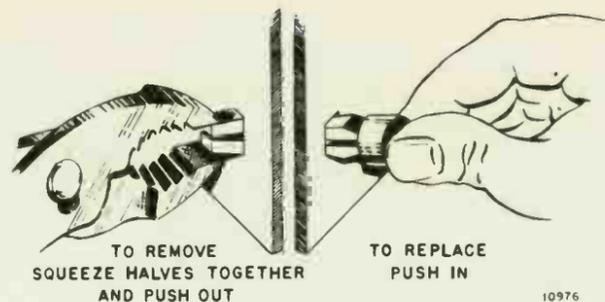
Method of Removing and Replacing Nylon Insulating Inserts.
